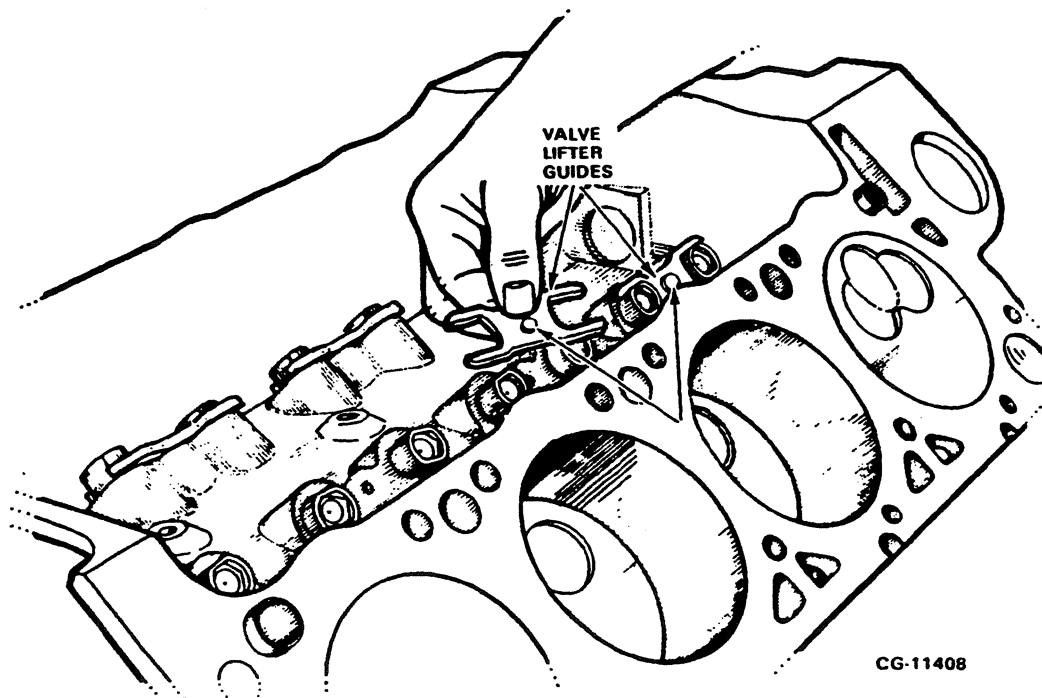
Hydraulic Valve Lifter Guide Installation
